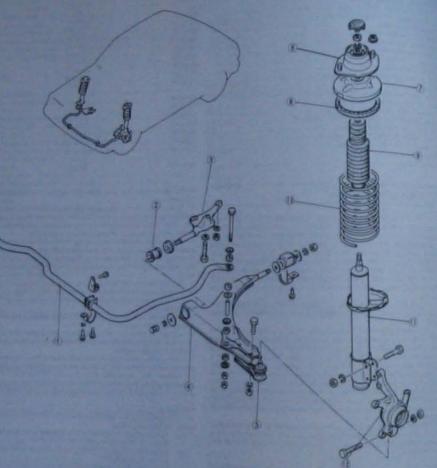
Exploded view of the front suspension pre-September 1985 models (Sec 1)
